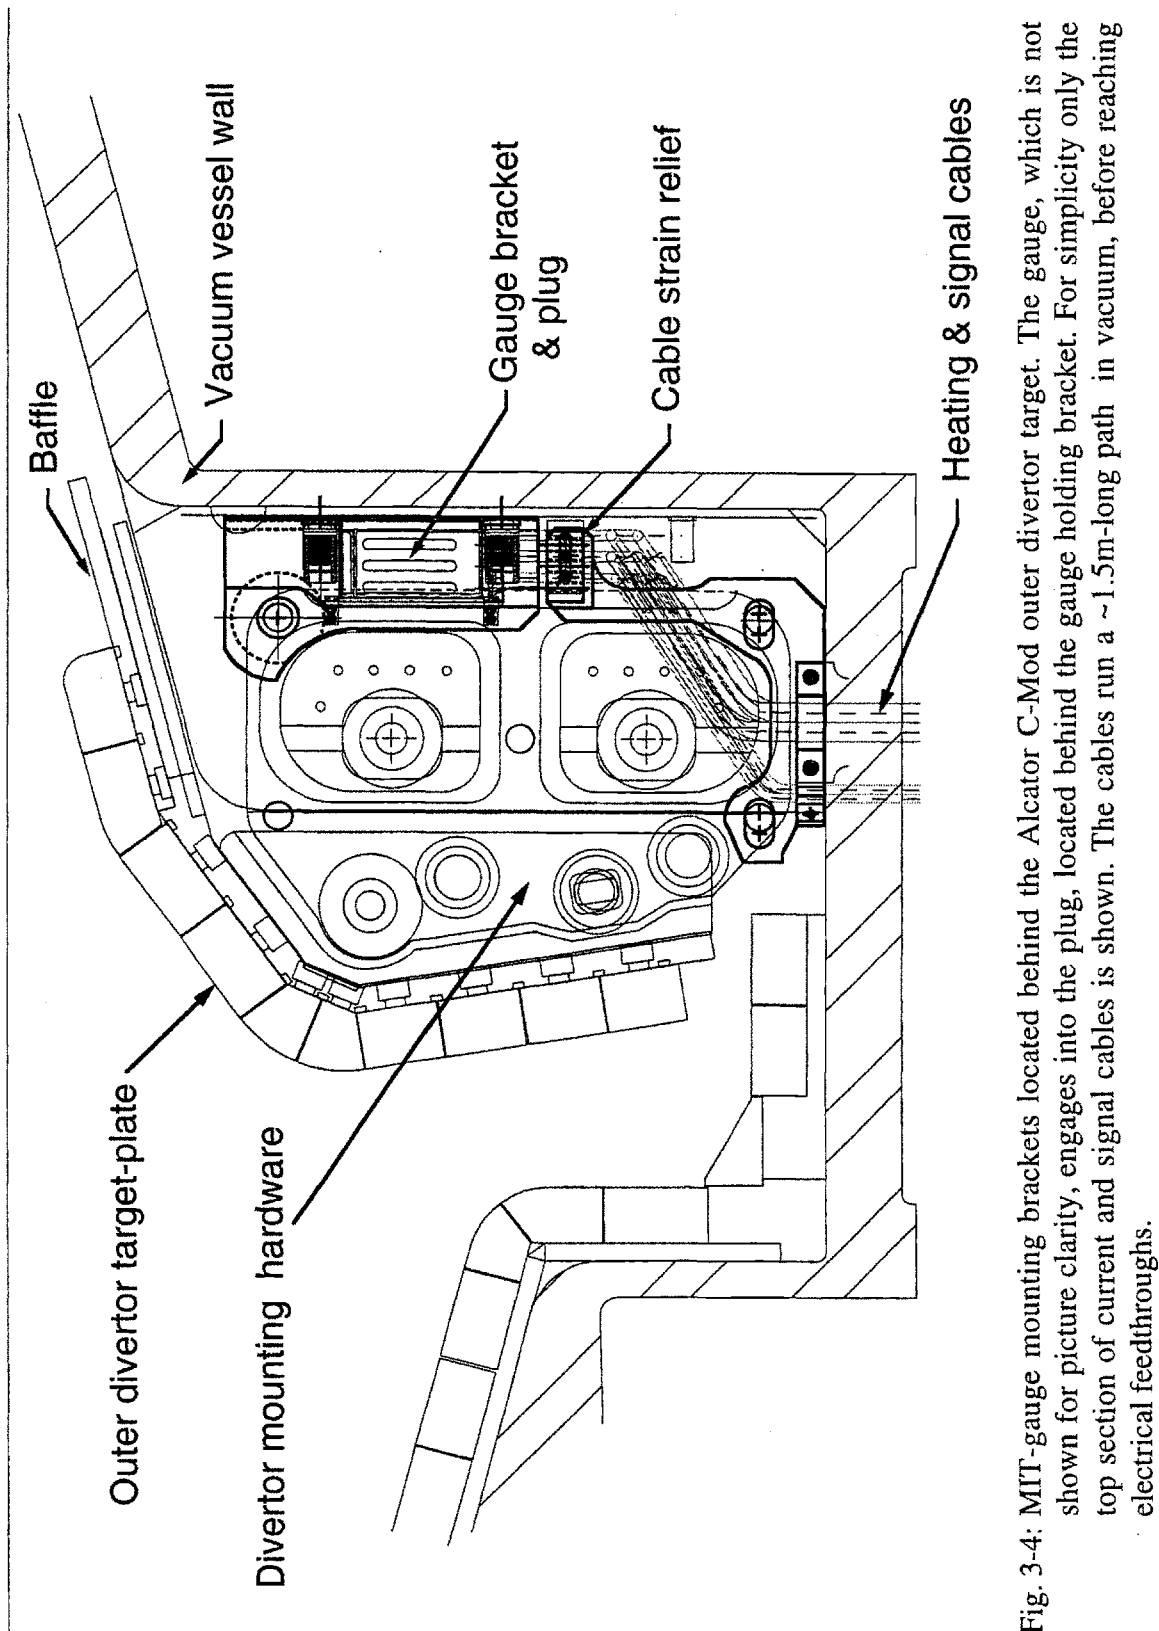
MIT-gauge mounting brackets located behind the Alcator C-Mod outer divertor target. The gauge, which is not shown for picture clarity, engages into the plug, located behind the gauge holding bracket. For simplicity only the top section of current and signal cables is shown. The cables run a ~1.5m-long path in vacuum, before reaching electrical feedthroughs.
